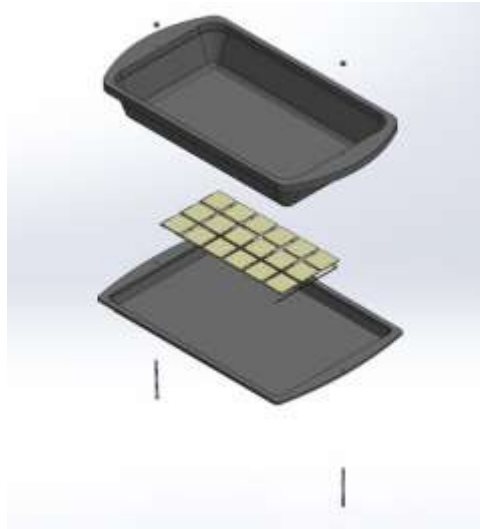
Solidworks Based Design Drawing of Prototype (in 3D)
